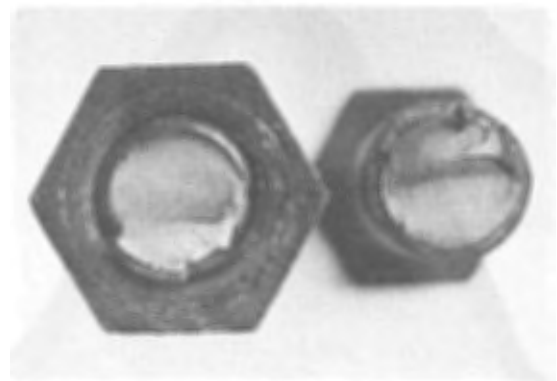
Fatigue fracture surfaces of bolt.
